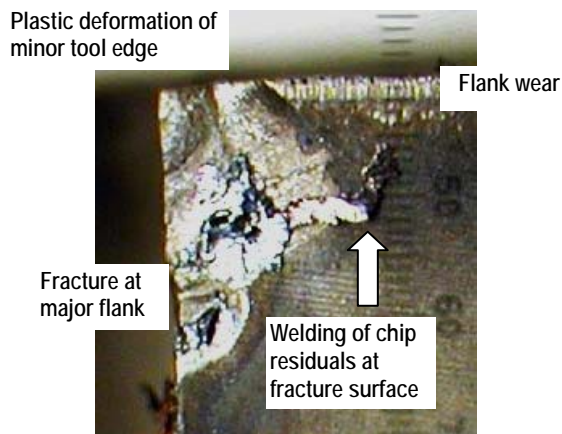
Outer appearance of tool fracture accompanied with plastic deformation at minor tool edge, $f = 0,28 \text{ mm}$
